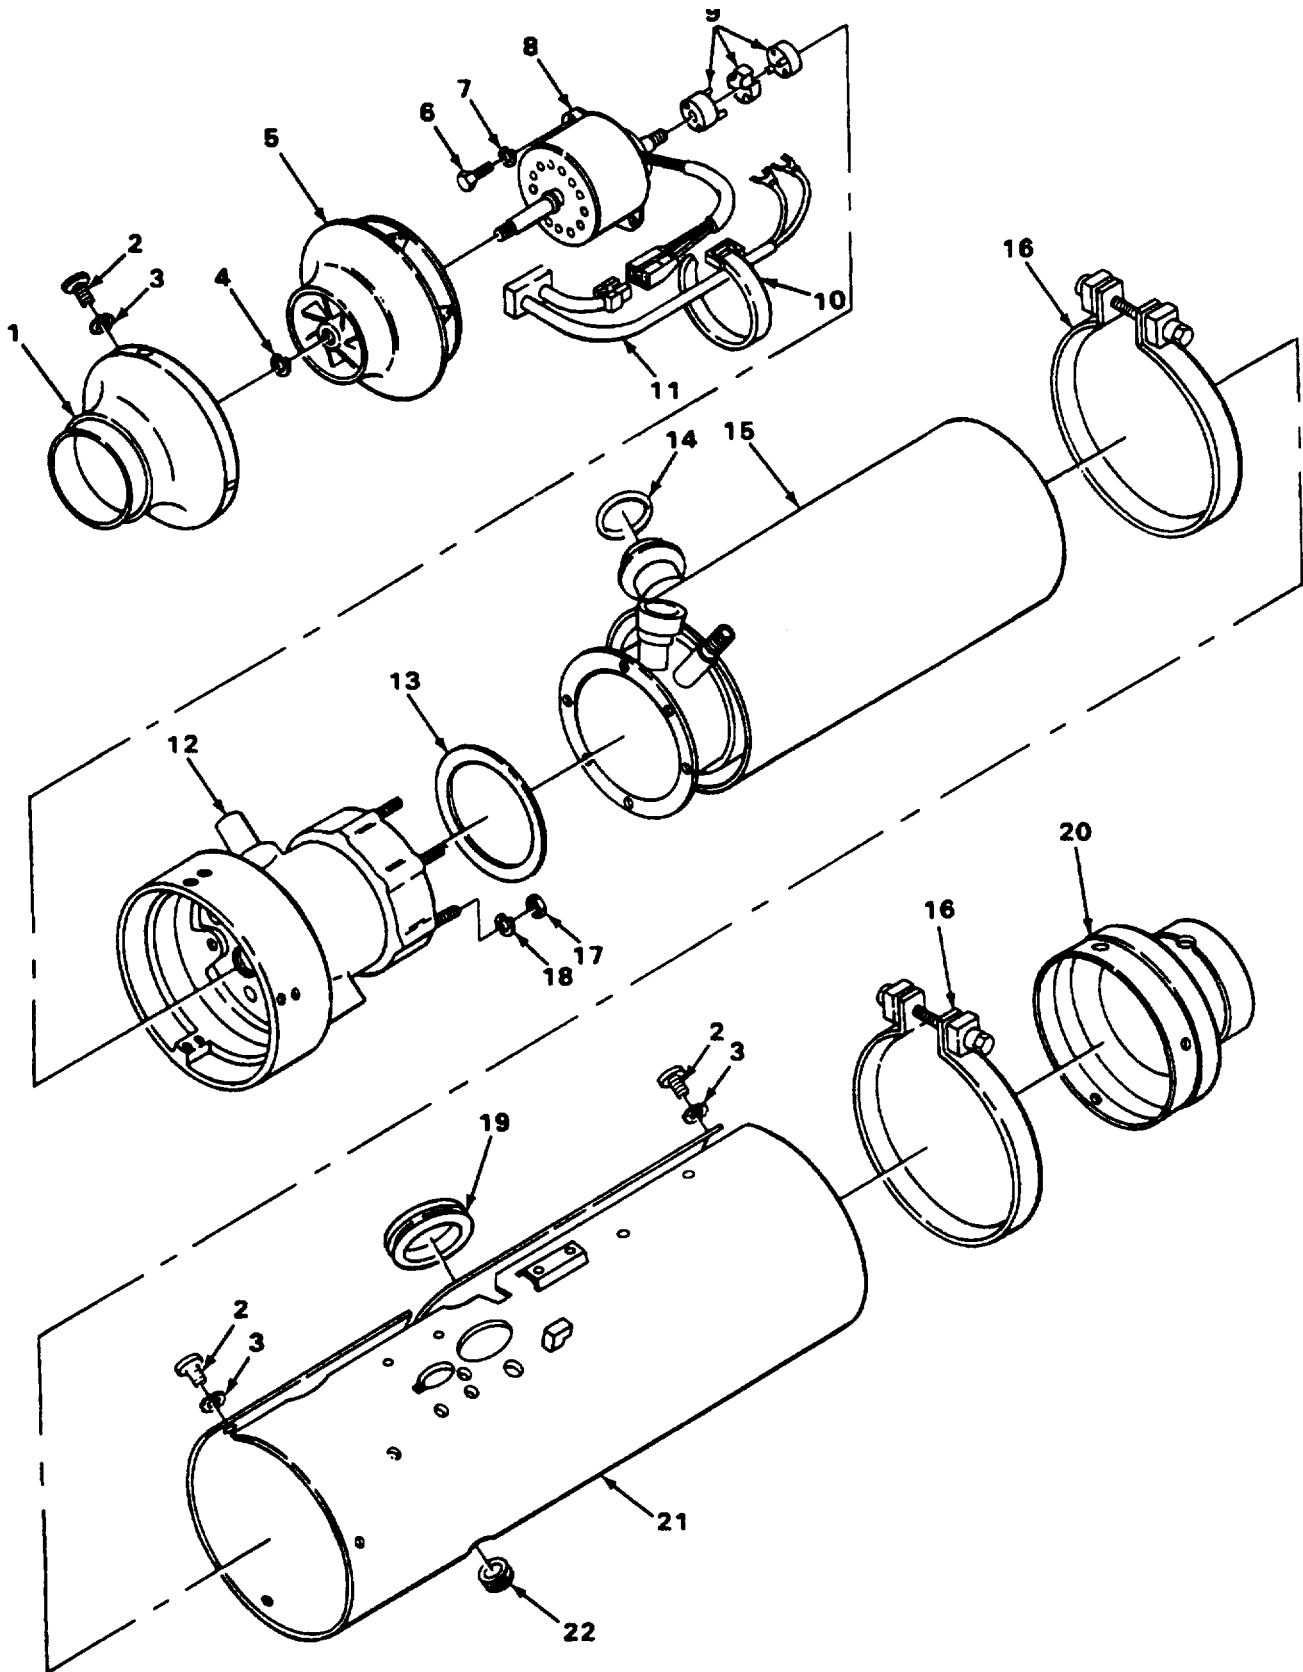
ESPAR MODEL V7S BURNER ASSEMBLY AND HEAT EXCHANGER.
